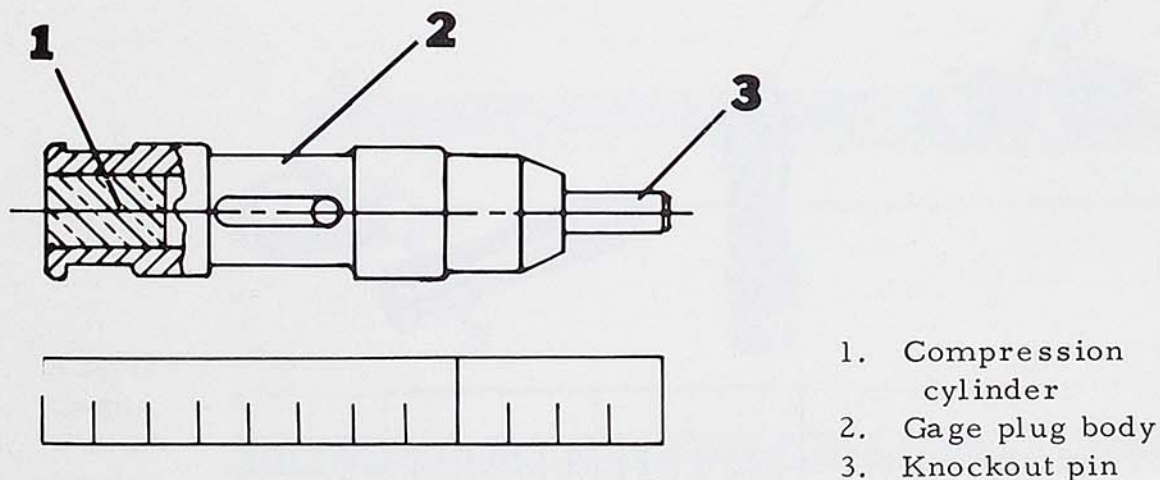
Typical Plug Gage for Measuring Firing Pin Indentation.
